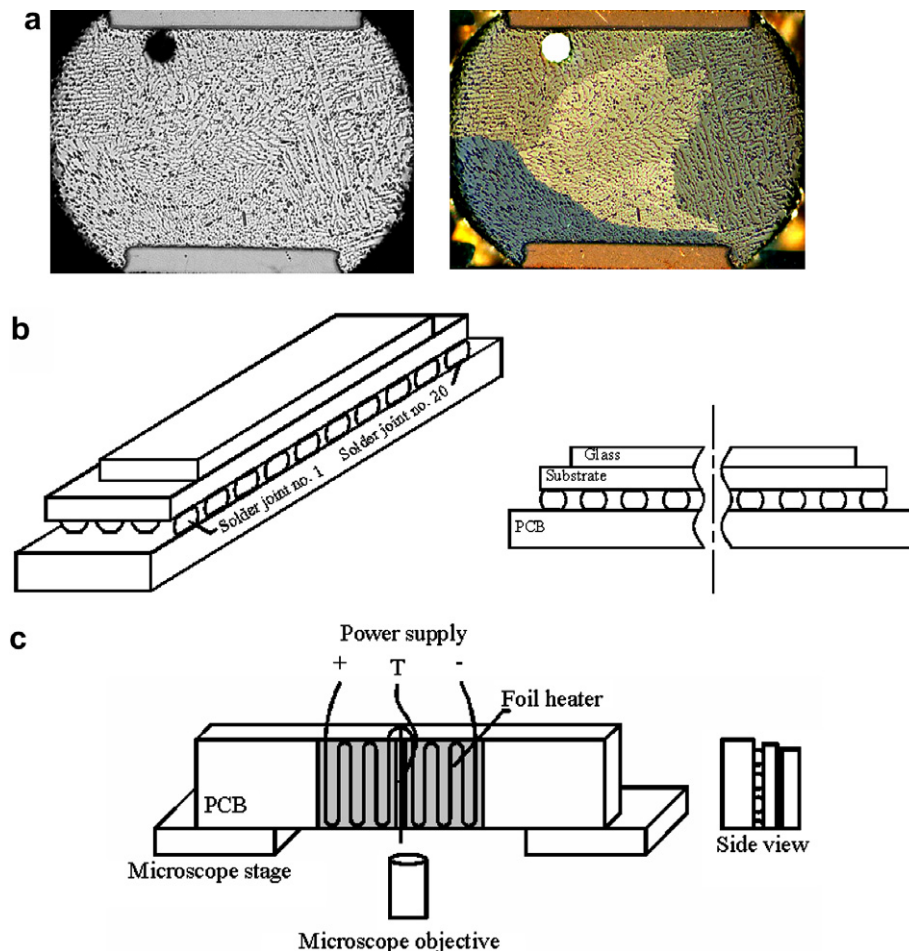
Schematic of the test sample and experimental set-up. (a) BF and XP images of the cross-section of a solder interconnect. (b) A schematic of the test sample. (c) Set-up showing heating of the PCB side of the test sample on the microscope stage.
